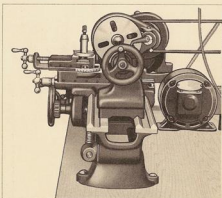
VIEW OF LATHE FROM TAILSTOCK END.
